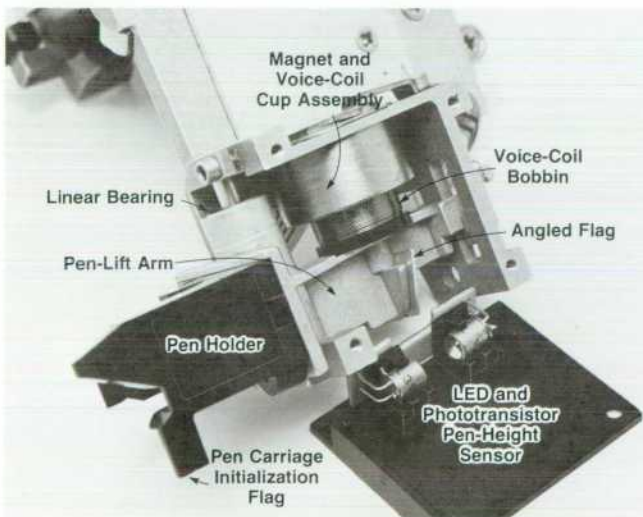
The pen-lift mechanism moves the pen vertically on a linear ball bearing guided by a stainless steel shaft. The pen holder is made of plastic and is electromagnetically driven by a voice coil and magnet arrangement. The pen-height sensor consists of an angled flag and an LED-phototransistor pair (see Fig. 5).
